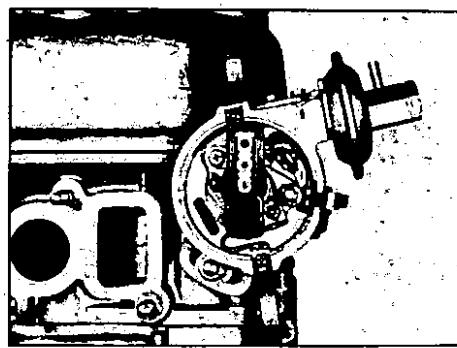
Installing the ignition distributor - note the position of rotor.
